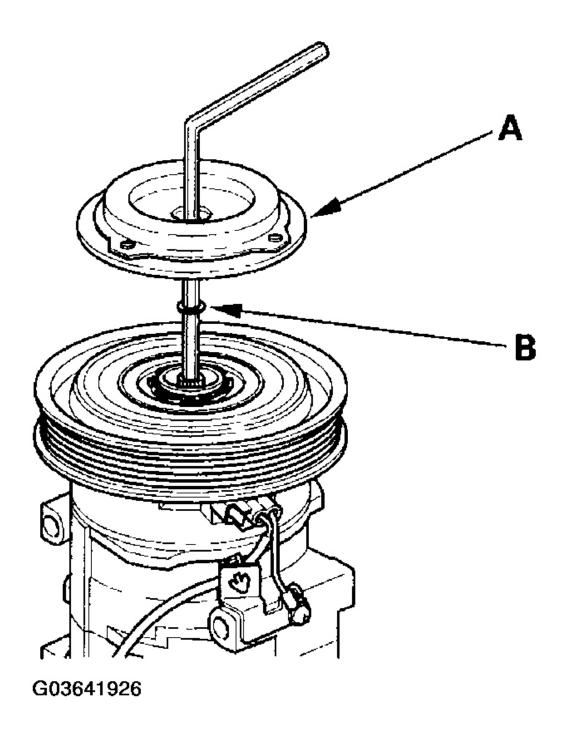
Removing Pressure Plate And Shim Courtesy of AMERICAN HONDA MOTOR CO., INC.
